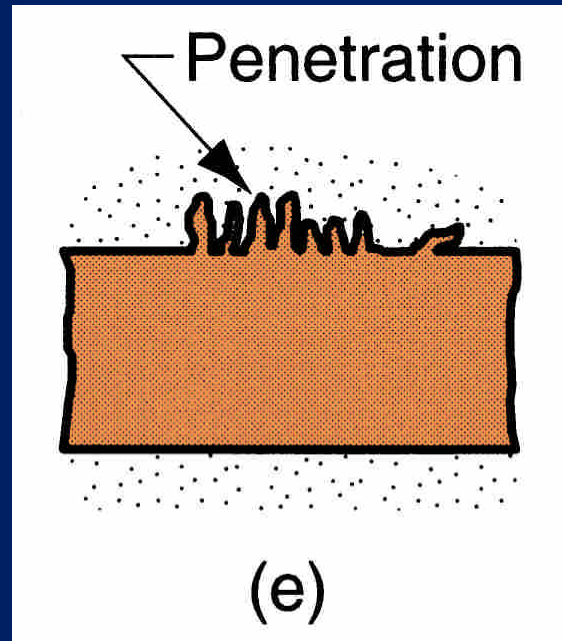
Common defects in sand castings: (e) penetration
